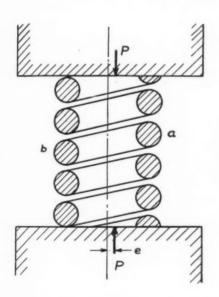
A helical spring shown under compression. Note the eccentricity of loading
